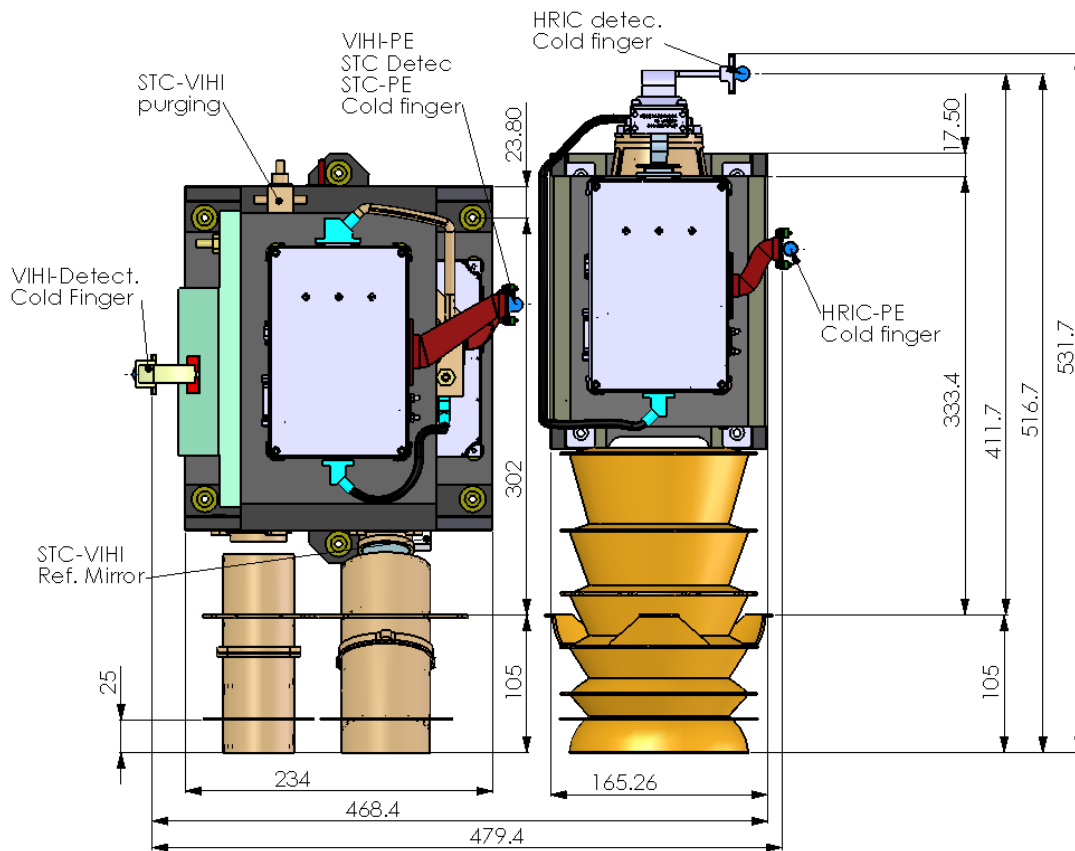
SIMBIO-SYS main dimension (upper view)
